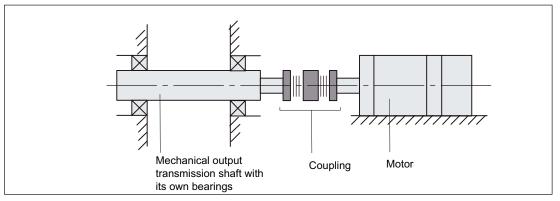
Mechanical output transmission shaft with its own bearings and compensating coupling
